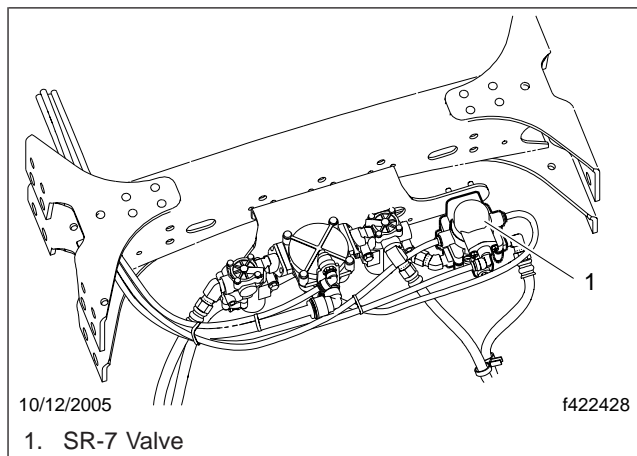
, SR-7 Spring Brake Modulating Valve Installation (typical)
